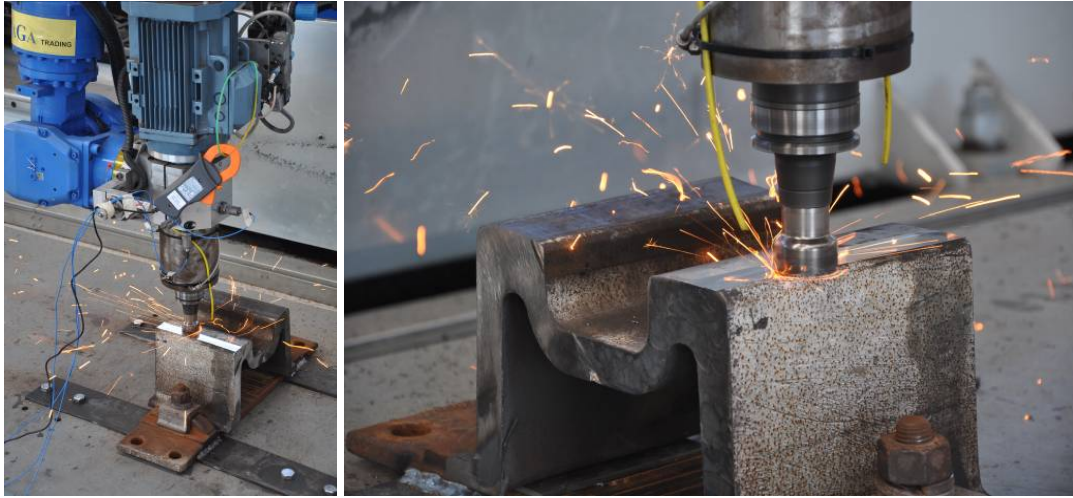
Machining tests on a specimen taken from a cast AMS crossing. The three accelerometers and the current clamp are visible (left). Detail of the machining process (right).
